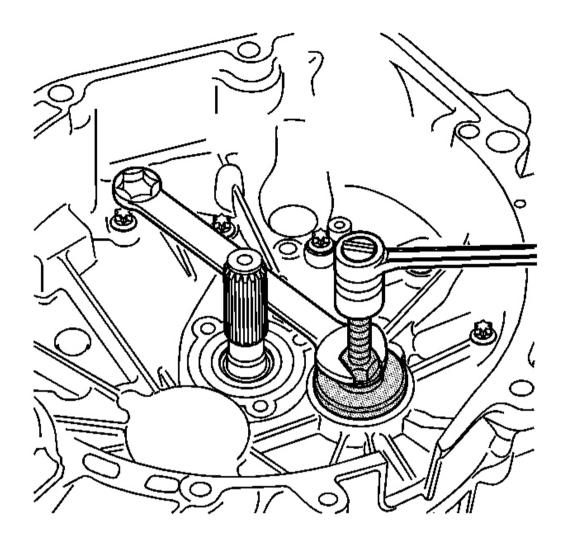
Installing Countershaft Into Clutch Housing Bearing Courtesy of GENERAL MOTORS CORP.
